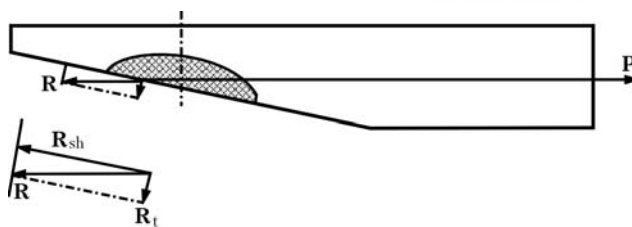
Schematic of equilibrium of one of the parts of the proposed welded joint
